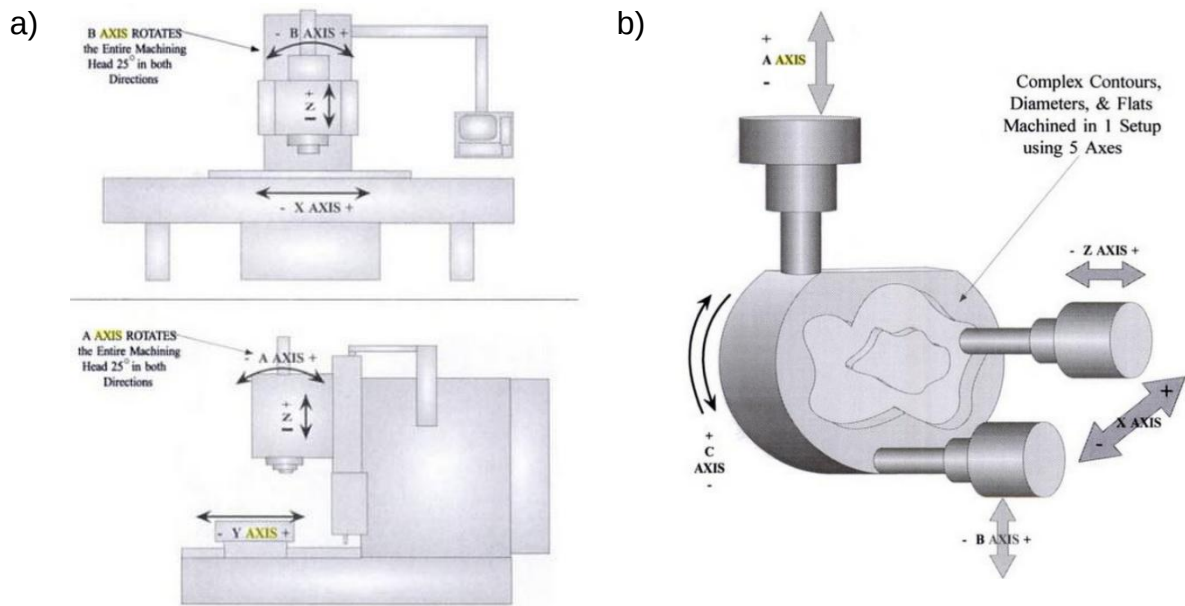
Two axis simultaneous machining a) milling b) turning , [16]
